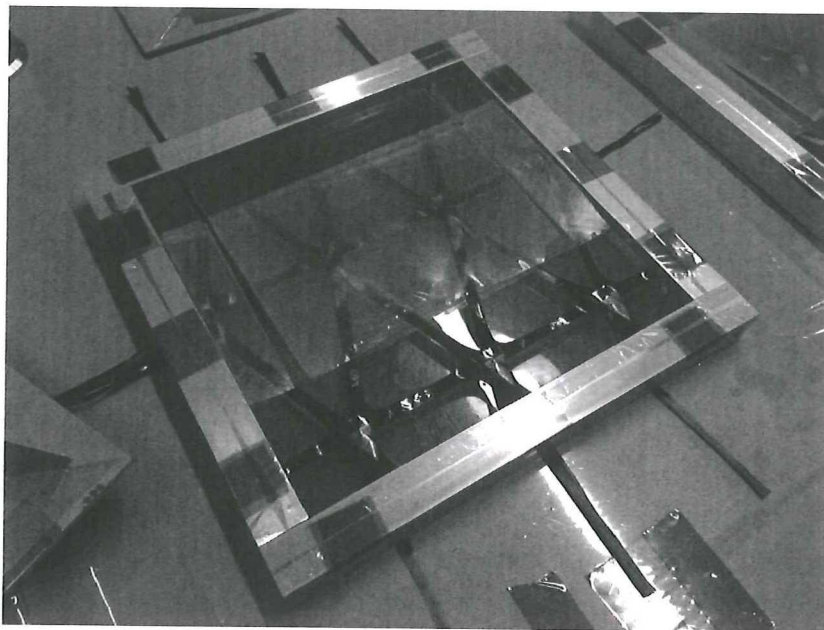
Finished layup with rubber expansion and autoclave tooling
